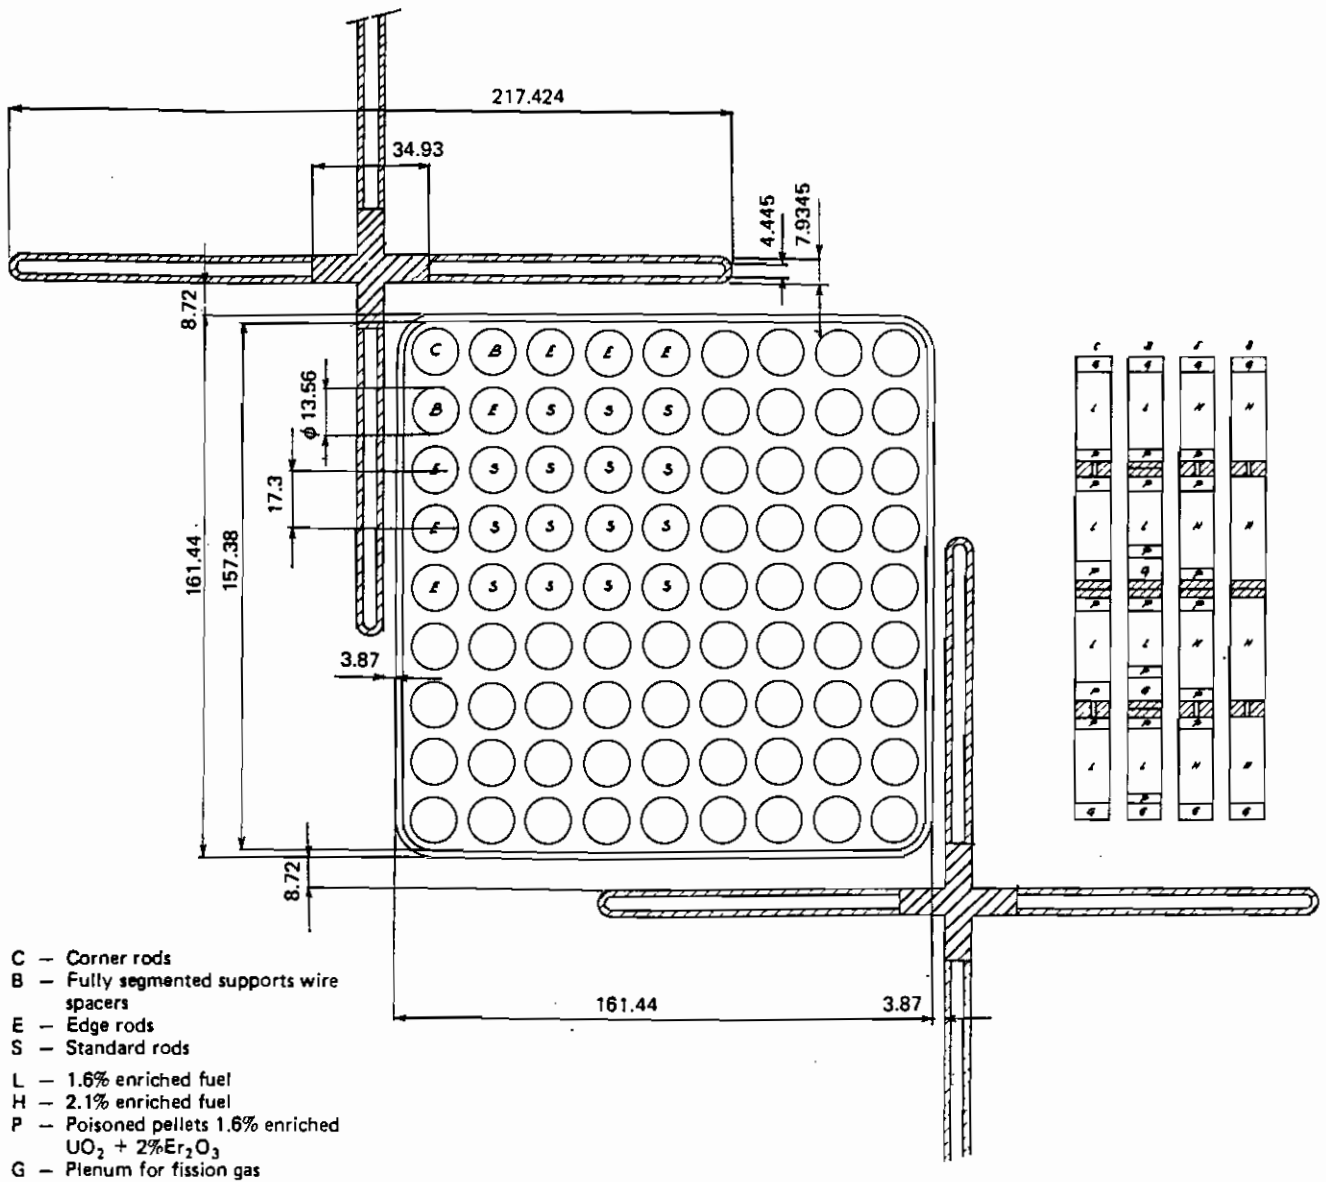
Horizontal cross-section of the Garigliano reactor fuel assembly (All dimensions are given in mm)
